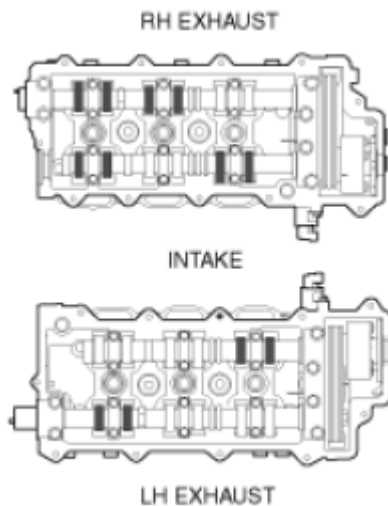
Identifying Intake And Exhaust Valve Clearance
